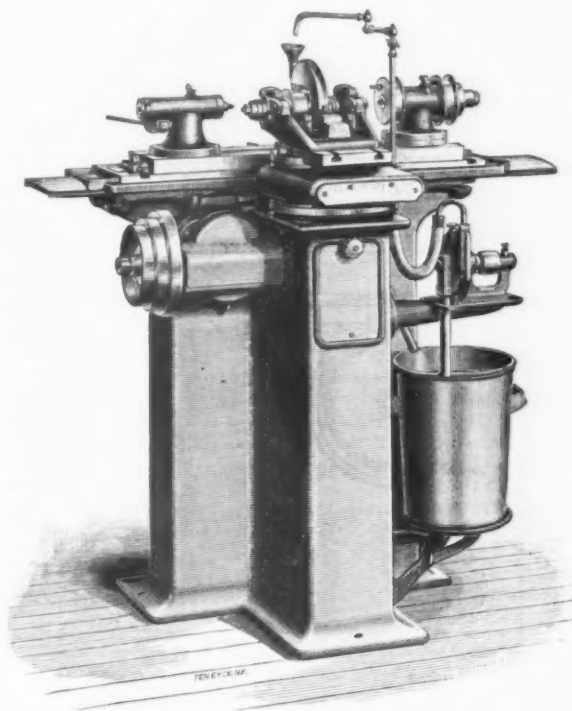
No. 1 Universal Grinding Machine.—Rear View.
